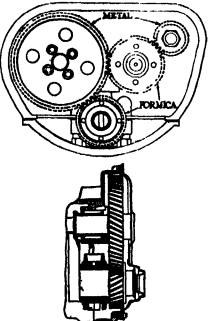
Four-gear train for front end drive on Buick employing Formica gears for crankshaft and idler gears, and metal gears for the camshaft and generator drive gears.
